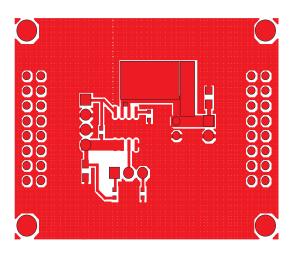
AAT4601 Evaluation Board Component Side Layout.
